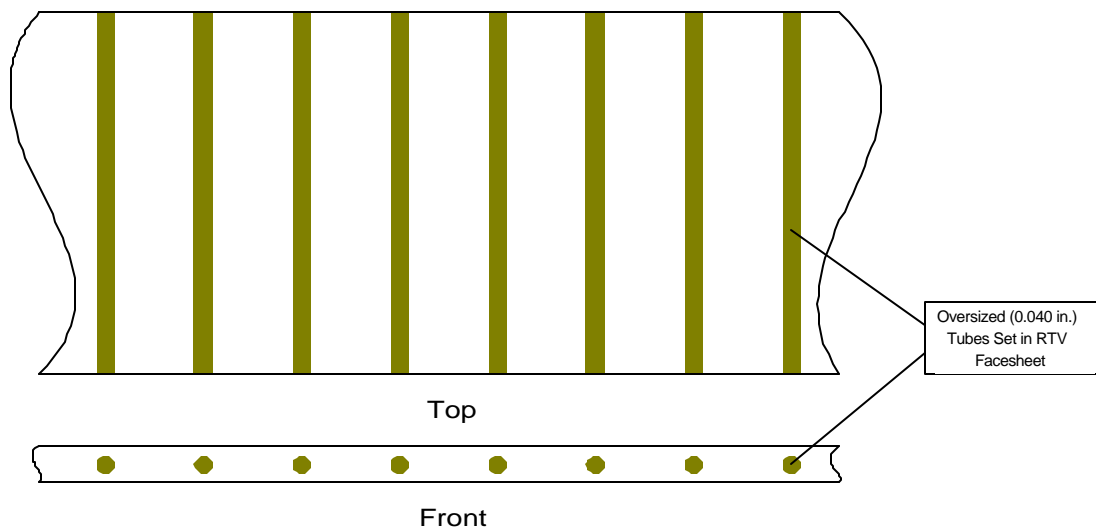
Facesheet Detail Showing Tubes and SMA Wire Placement
